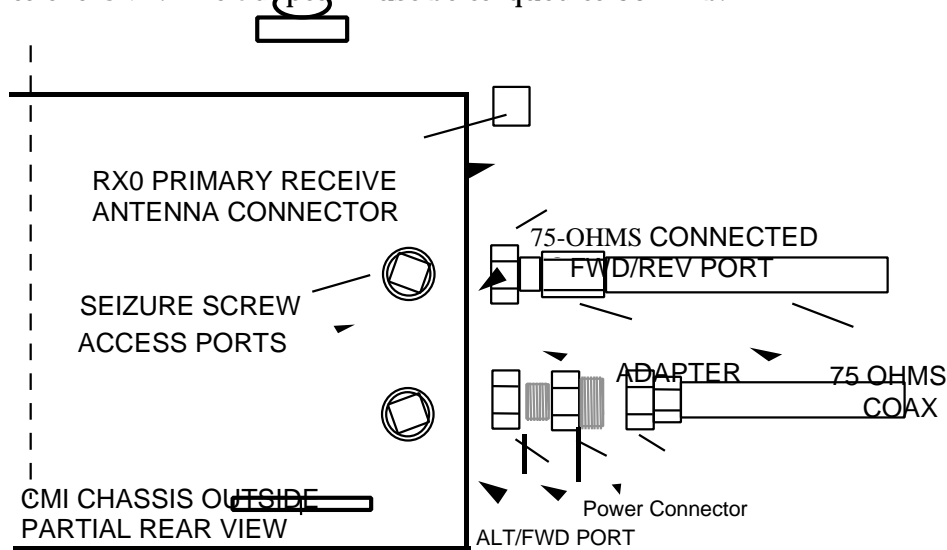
Assembly of Typical Housing to Hard-line/Power Connectors
